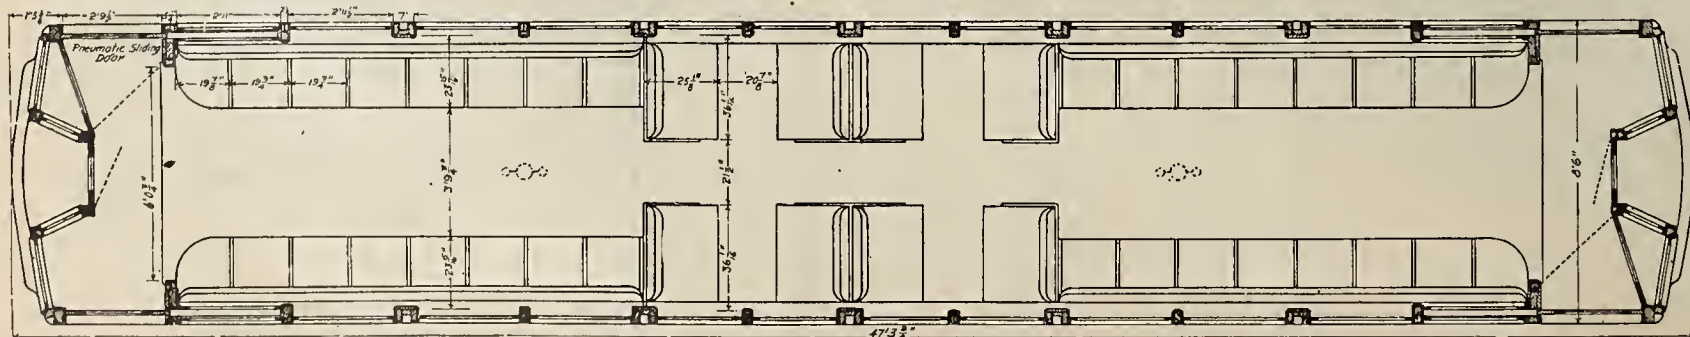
FLOOR PLAN STEEL CARS, METROPOLITAN RAIL ROAD, CHICAGO.
